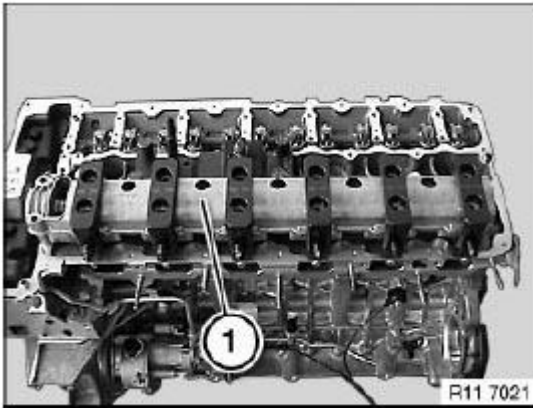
Identifying Intake Camshaft With Bearing Strips On Cylinder Head
